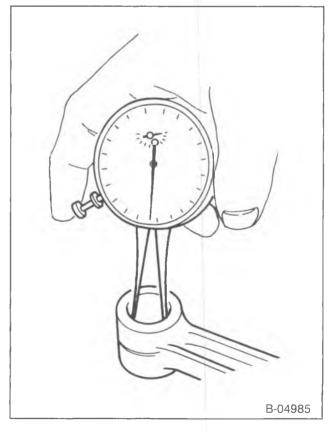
Measuring Piston Pin Bushing Inside Diameter
